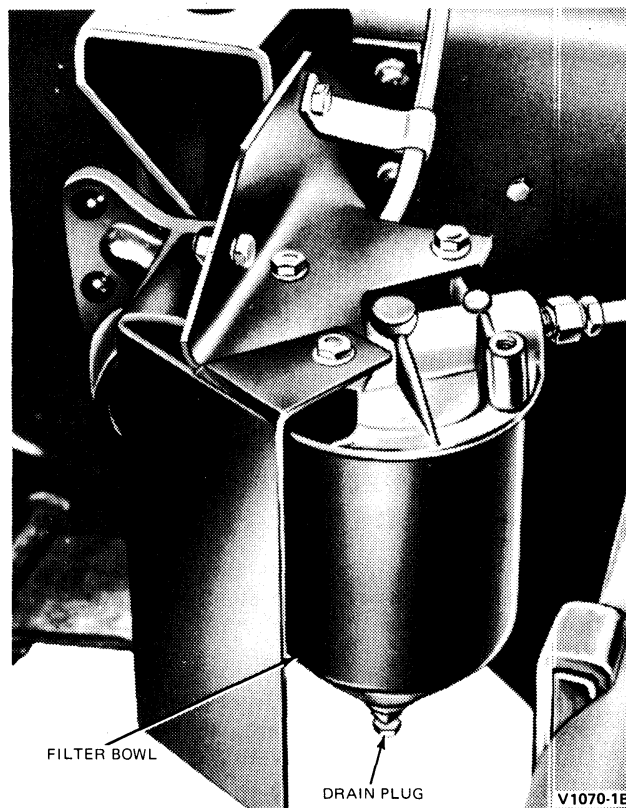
Frame-Mounted Fuel Filter—In-Line with 7.8L (477 CID) and 8.8L (534 CID) Engines
